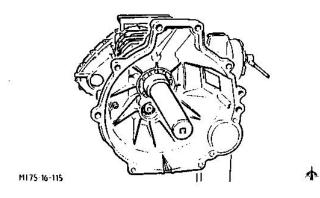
Remove clutch release bearing guide sleeve using Special Tool 16-040.
